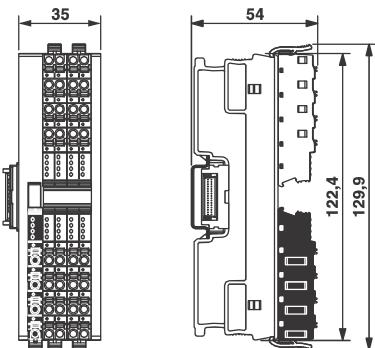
Nominal dimensions of the H housing with two terminal fields
